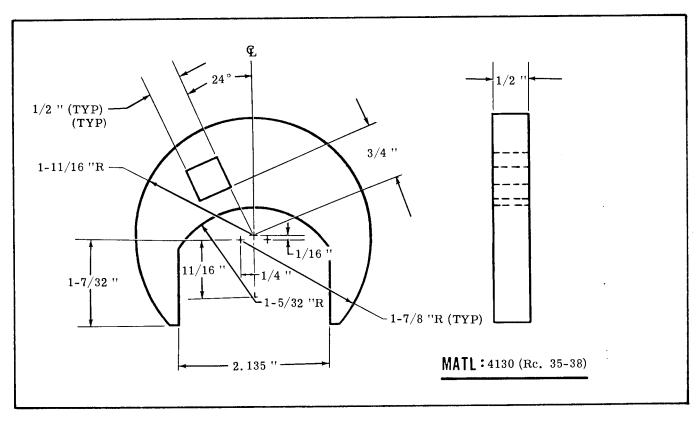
Oil Filter Adapter Wrench Fabrication
